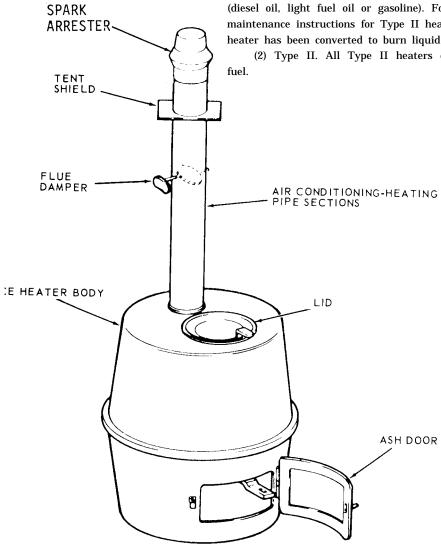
Space heater (Type I without Conversion Kit installed) (sheet 1 of 2).
